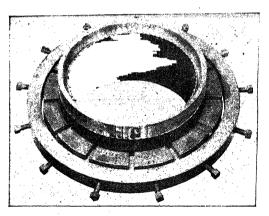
Method of Constructing and Forming Large Commutator Courtesy of General Electric Company
